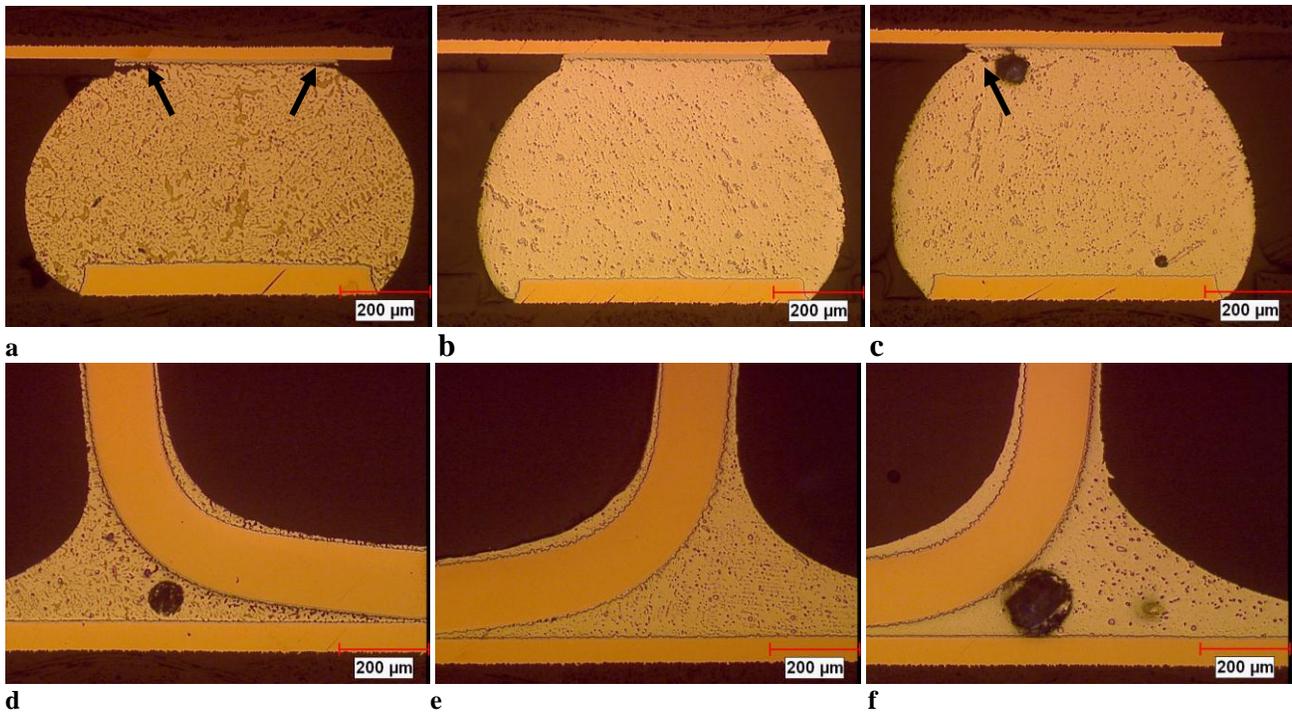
Microstructure of solder joints formed on 150°C Tg boards with OSP finish after -55°C to 125°C cycling:
